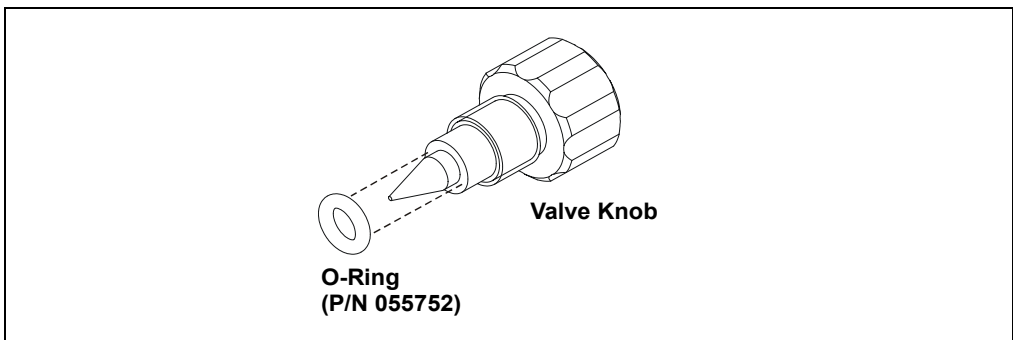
Waste Valve or Priming Valve O-Ring Replacement
